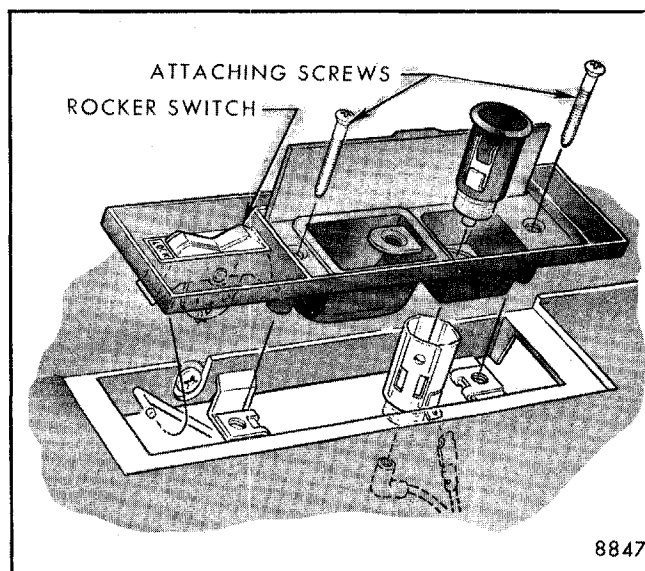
Rear Door Armrest Cover - "K" Style Shown, Other Styles Similar
